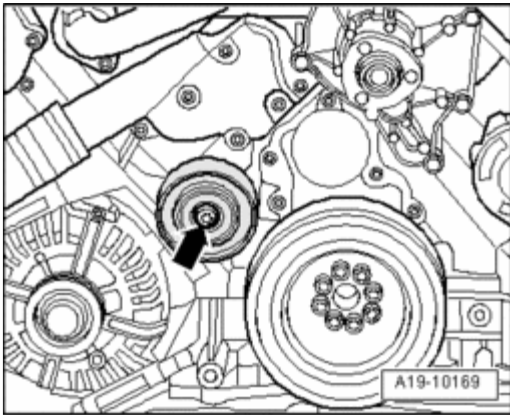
Removing Bolt And Disconnecting Idler Roller
